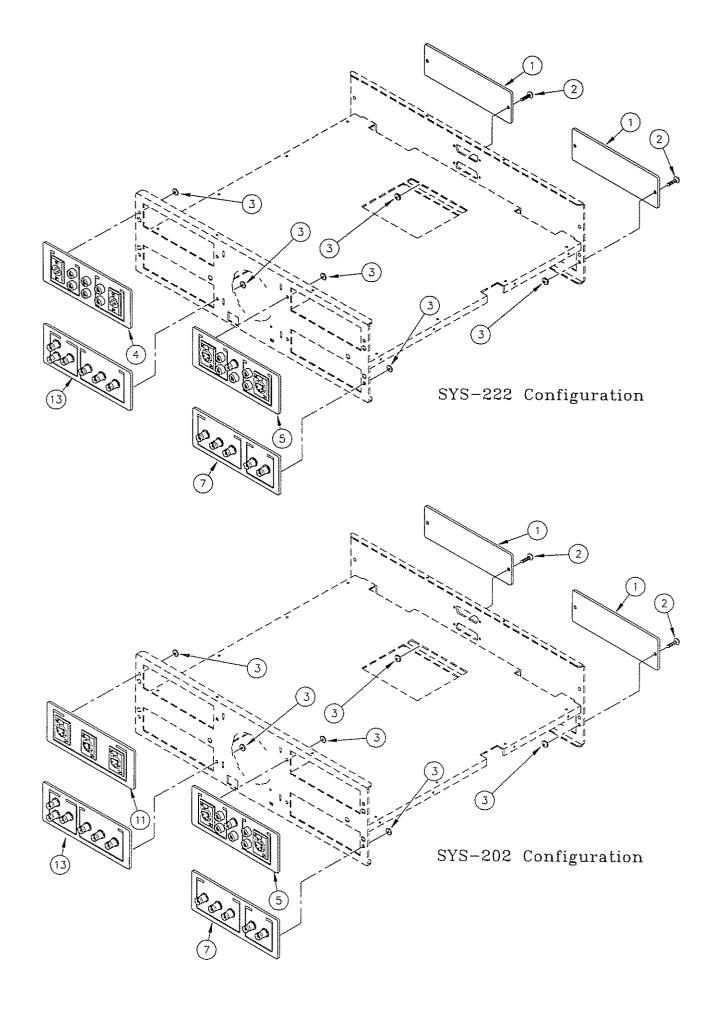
FRONT AND REAR PANEL ASSEMBLY
